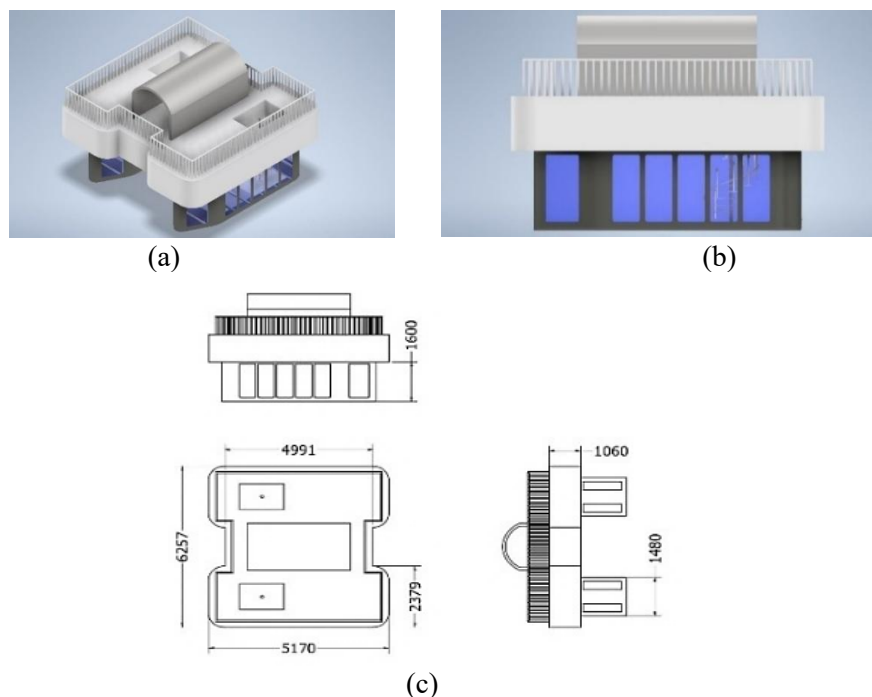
Design 2D semi-submarine glass-bottom catamaran; (a) Isometric view, (b) Side view, (c) Engineering drawing
